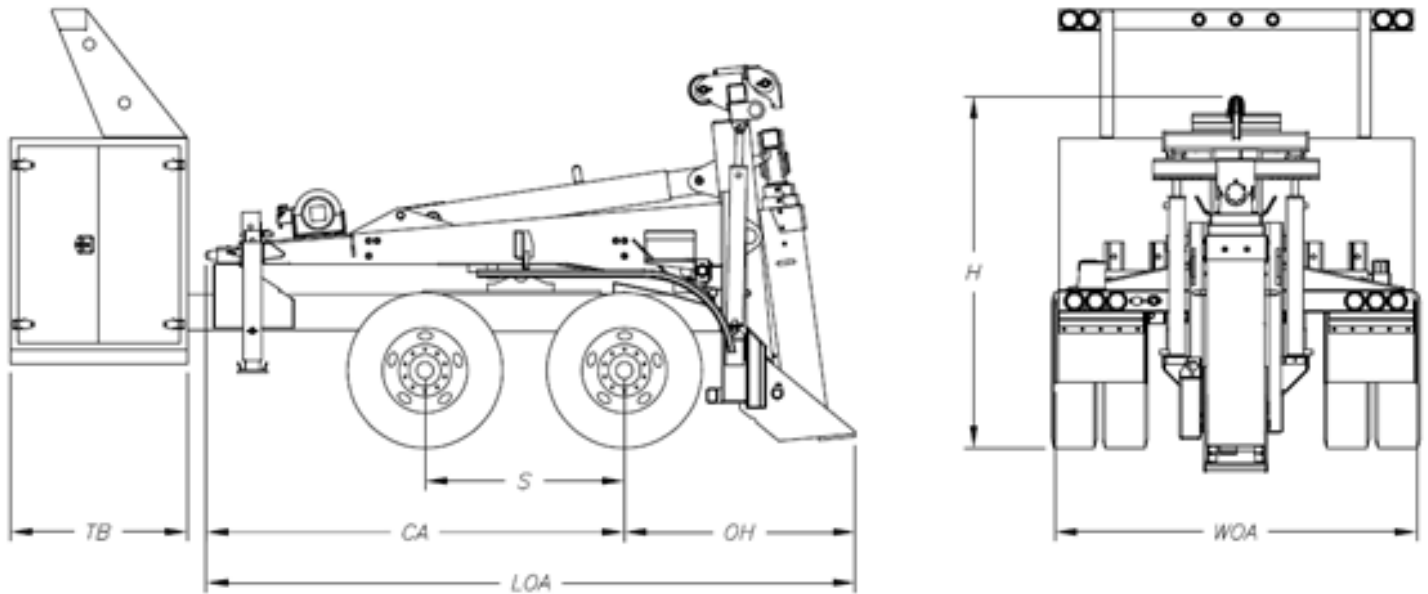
CHASSIS DIMENSIONS - STANDARD MODEL
